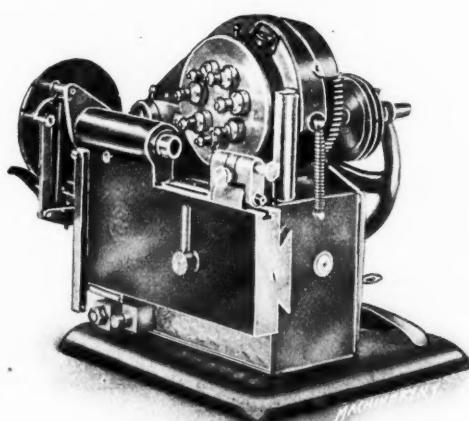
Automatic Machine for Cutting Escape Wheels for Watches.
